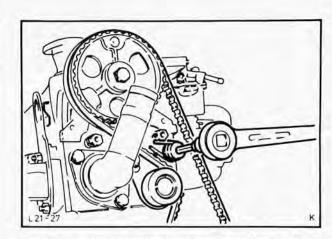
Slacken toothed belt tensioner using Special Tool 21–012
